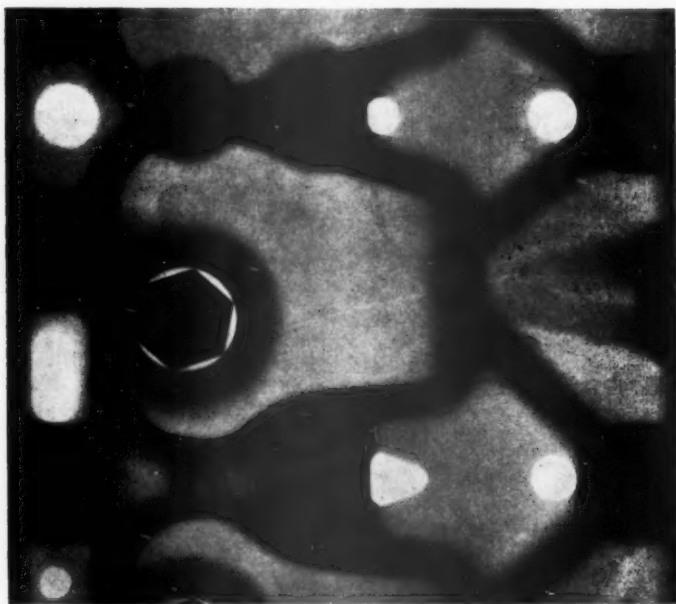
Radiograph of part of an aluminium cylinder-head, showing a system of cracks and some inclusions.
